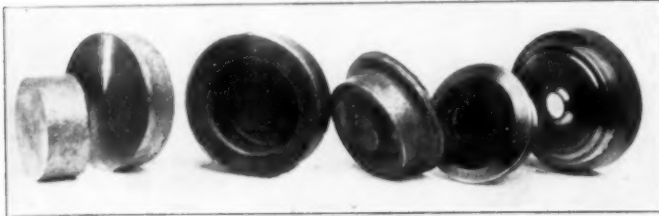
PLUGS AND SOCKETS, ROUGH AND FINISHED.
